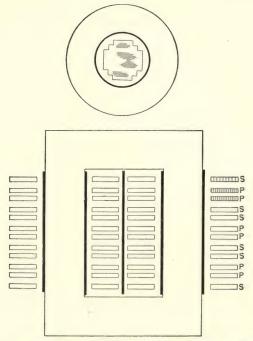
Interleaved Disc Coil Windings for Core-type Transformers.
